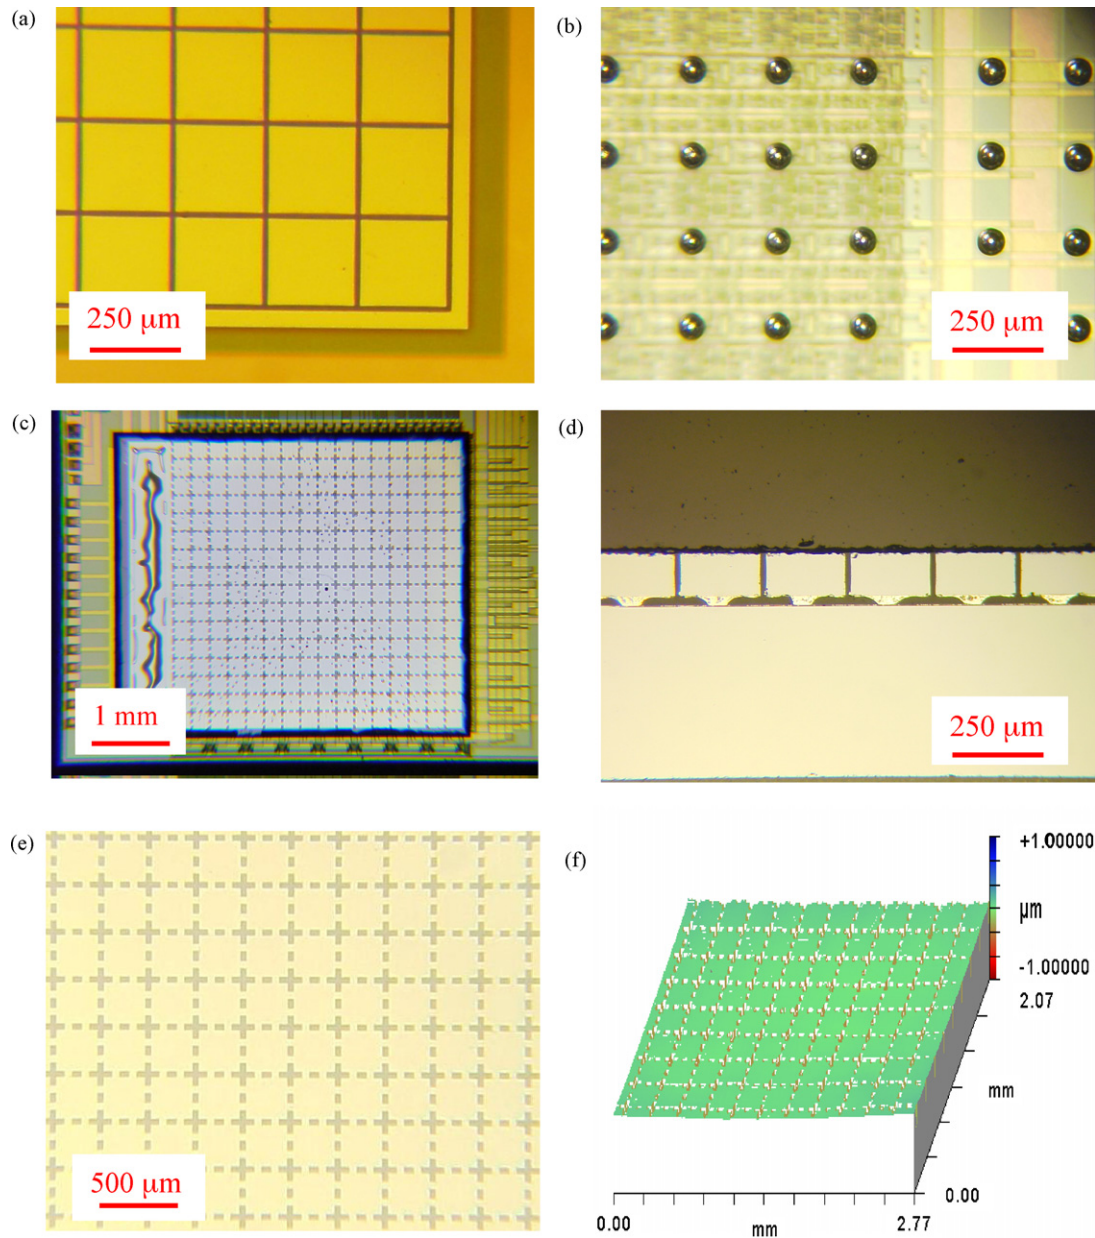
(a) Back side electrodes; (b) a section of an IC chip with eutectic solder balls placed using solder jetting; (c) a trench-isolated 2D CMUT array flip-chip bonded to an IC chip; (d) isolation trench and solder joint profiles after reflow; (e) array surface after releasing quartz carrier wafer; (f) corresponding optical profile.
